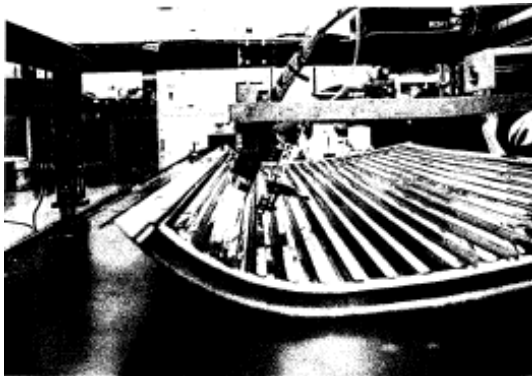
Core and external sheet of developed panel during welding work
